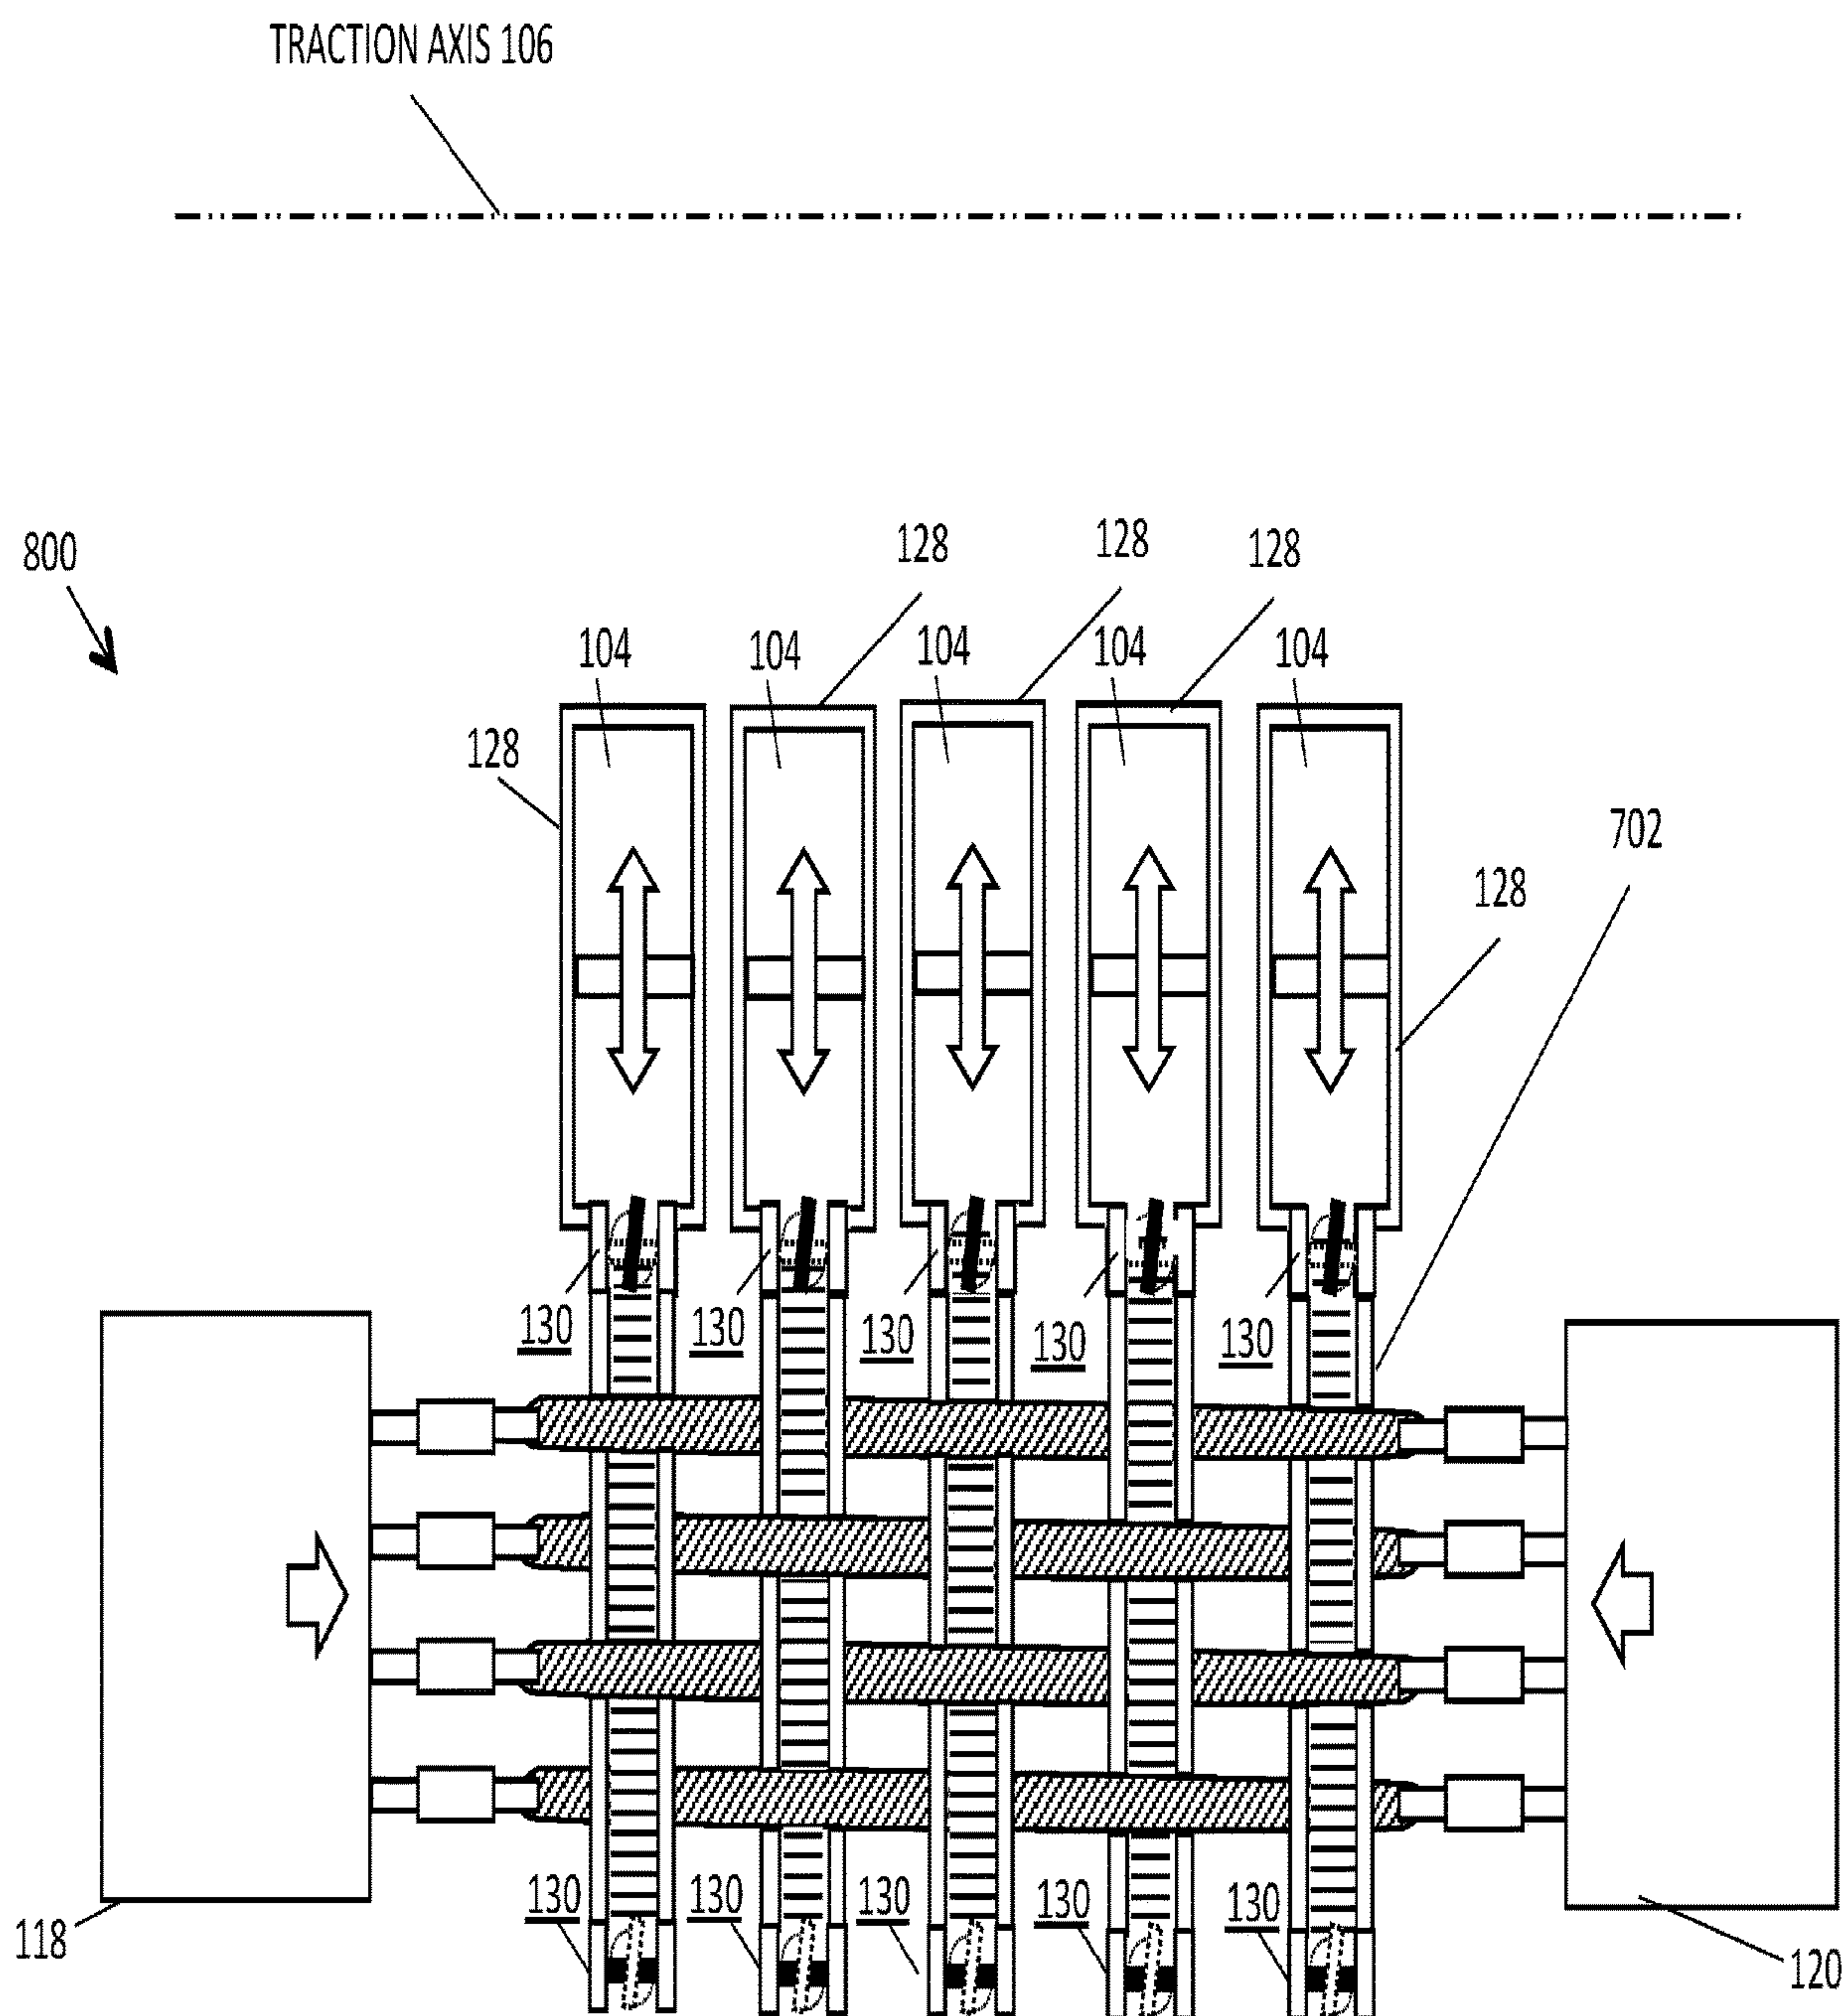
A: AIR COMPRESSOR FOR EVERY BLADDER (PZT PUMP)
